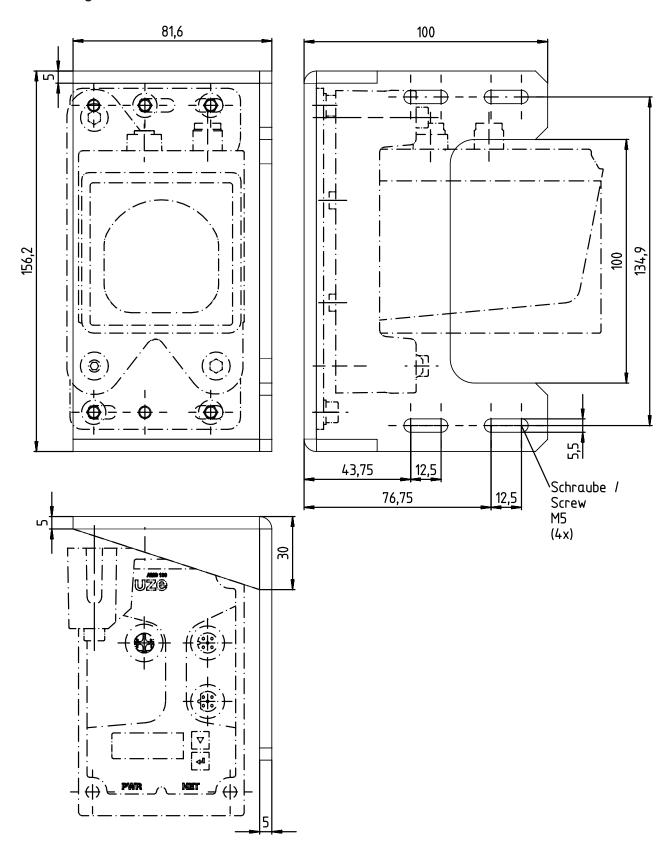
Dimensioned drawing MW OMS/AMS 01
